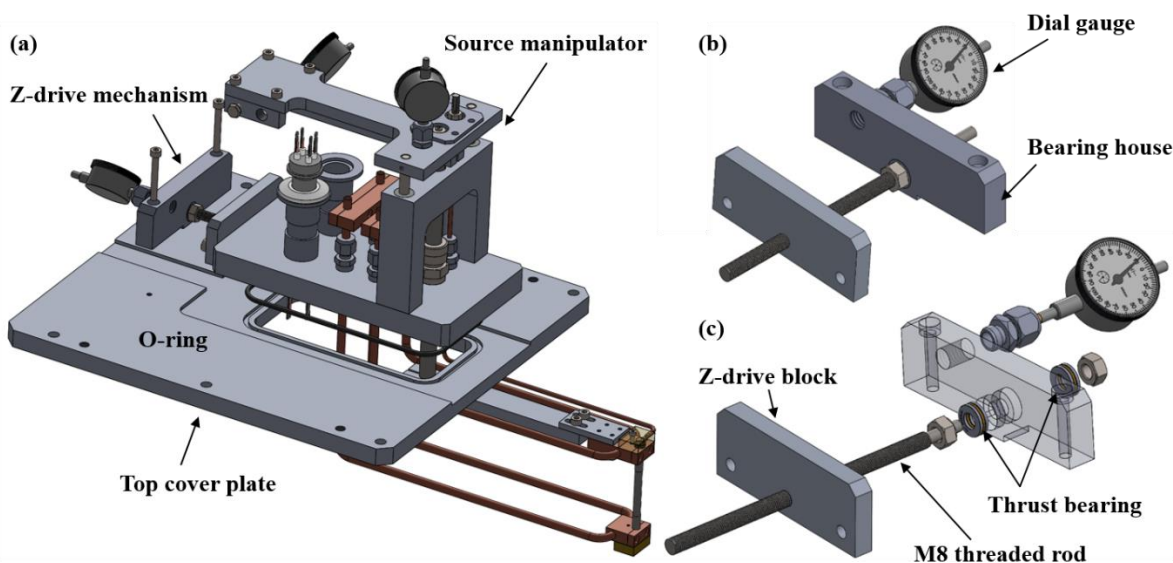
(a) 3D model of the source manipulator and the top cover plate of the source chamber in exploded view. (b) 3D model of the Z-drive mechanism. (c) Exploded view of the 3D model. the bearing housing attaches to the top cover plate and holds an M8 threaded rod by two nuts. Two thrust bearings (AST, F8-16M) located between the nut and the bearing house allow for rotation of the threaded rod which drives the Z-drive block and the source manipulator.
